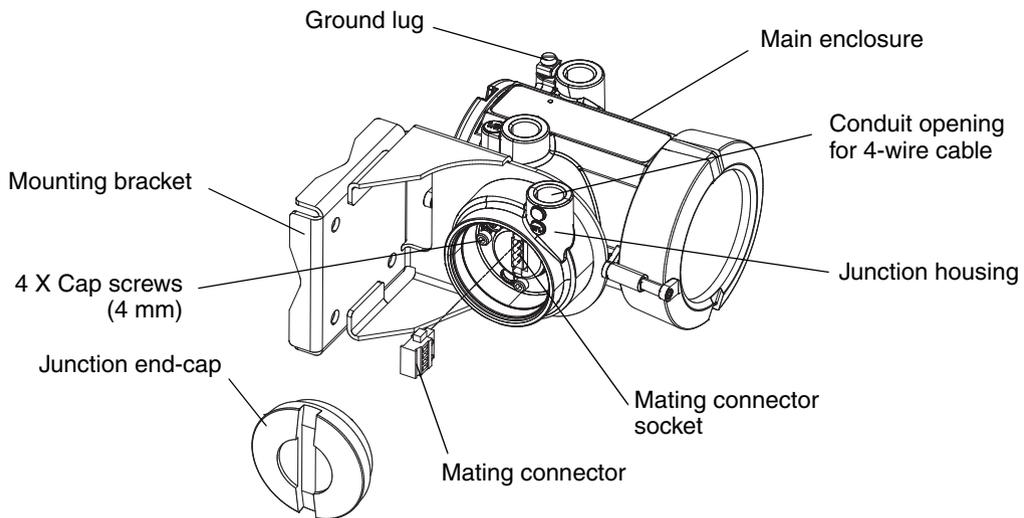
Transmitter/core processor assembly exploded view – 9-wire remote installations
